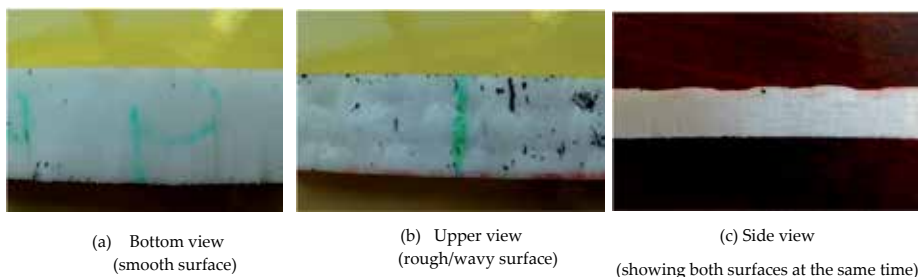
Different surfaces of an open-molded (oven vacuum bagged) twill specimen [68].
